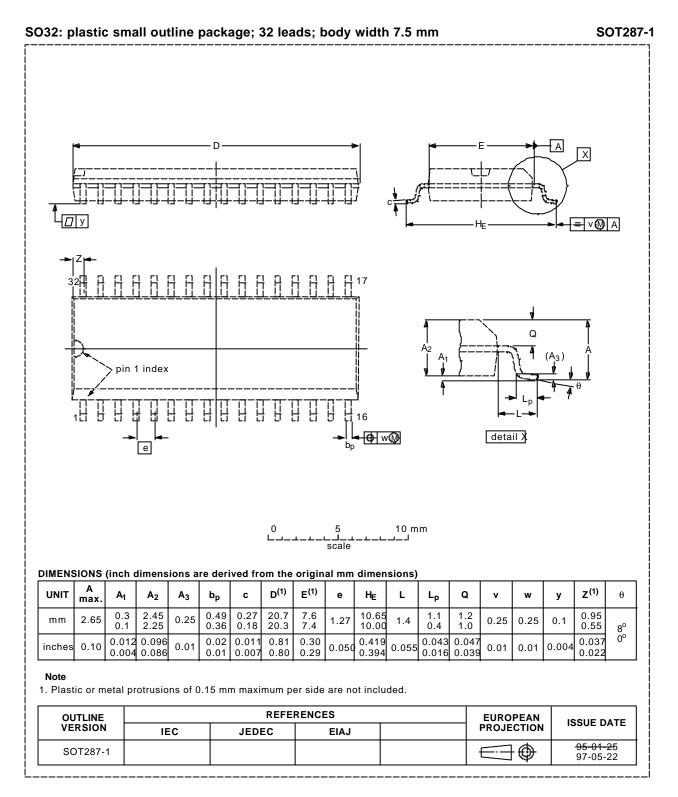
Outline and Dimension of SL RC400 in SO32
